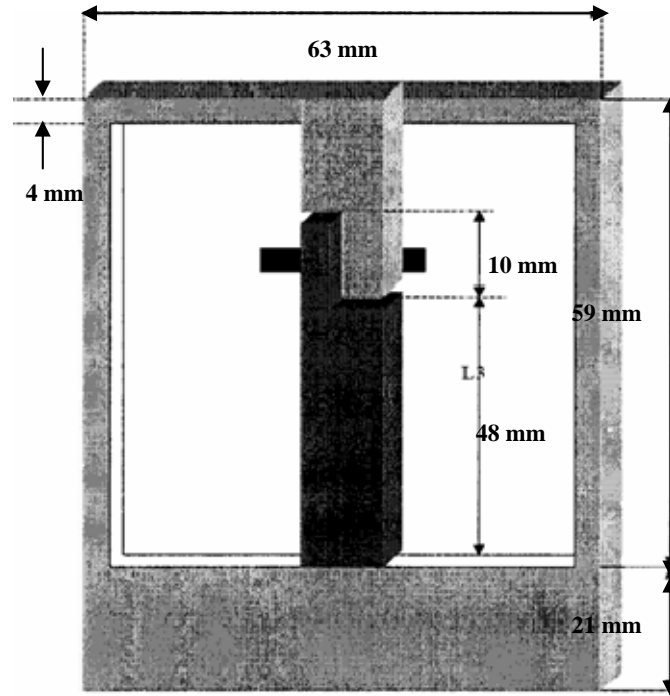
Bi-Metallic Frame Engineering Drawing [20].
